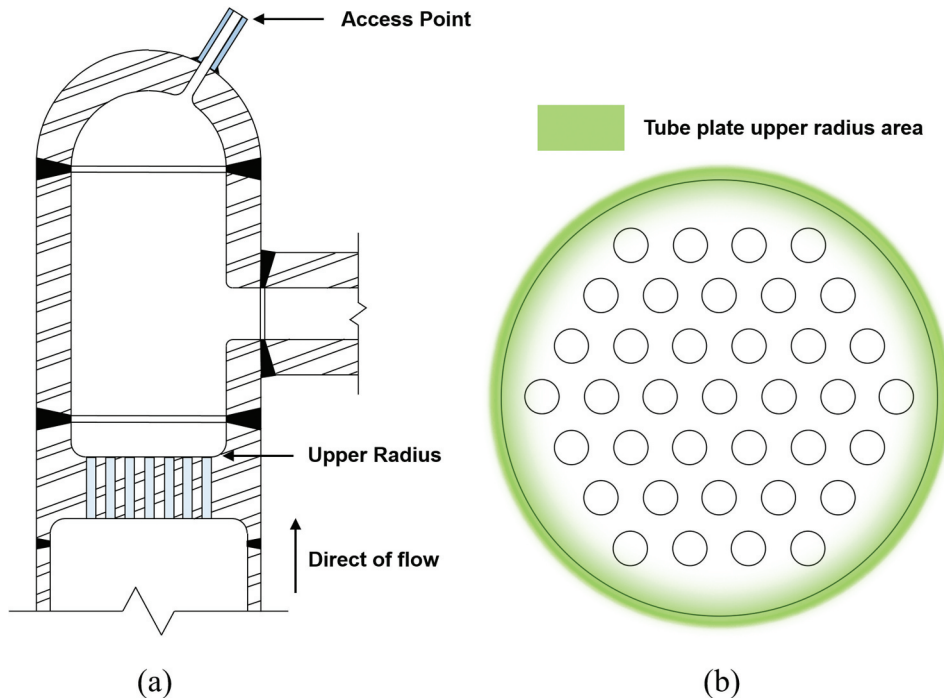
Superheater schematic: (a) cross-section view and (b) top view of the tube plate.
